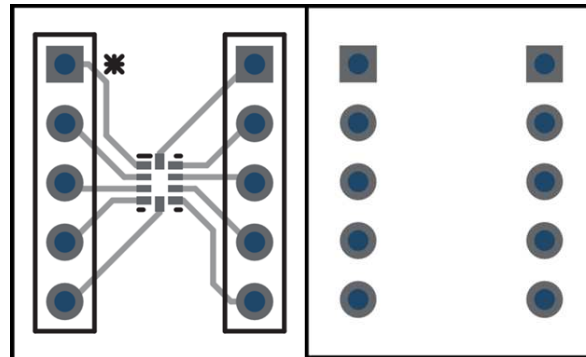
RUG package top layer (left) and bottom layer (right) PCB layout
